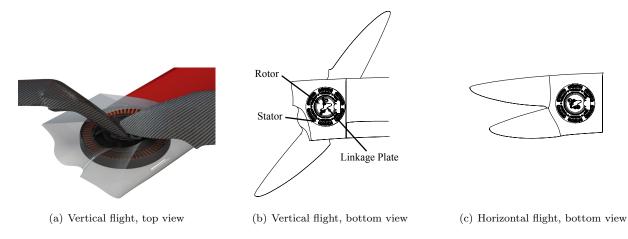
Illustrations of the wingtip blades in both configurations, showing the internal motor configuration
